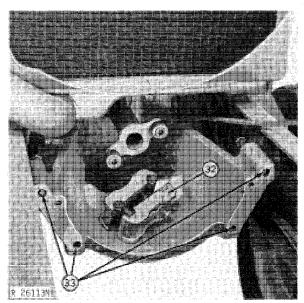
Hydraulic Pump Drive Coupling (Engine removed for illustration purposes)
